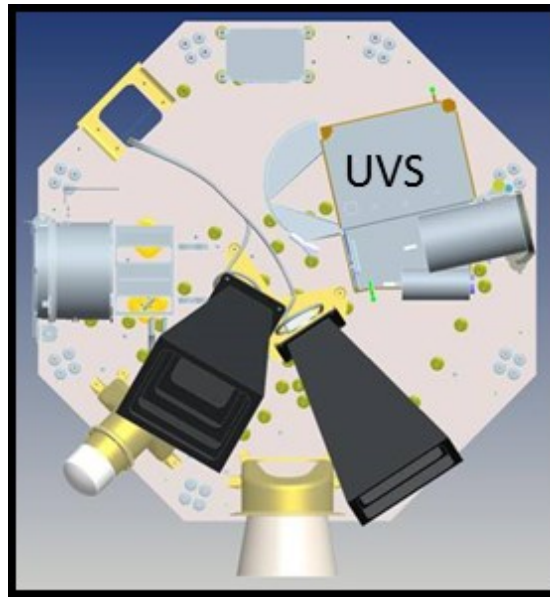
Shown is the location of UVS mounted on the spacecraft top radiator deck.
